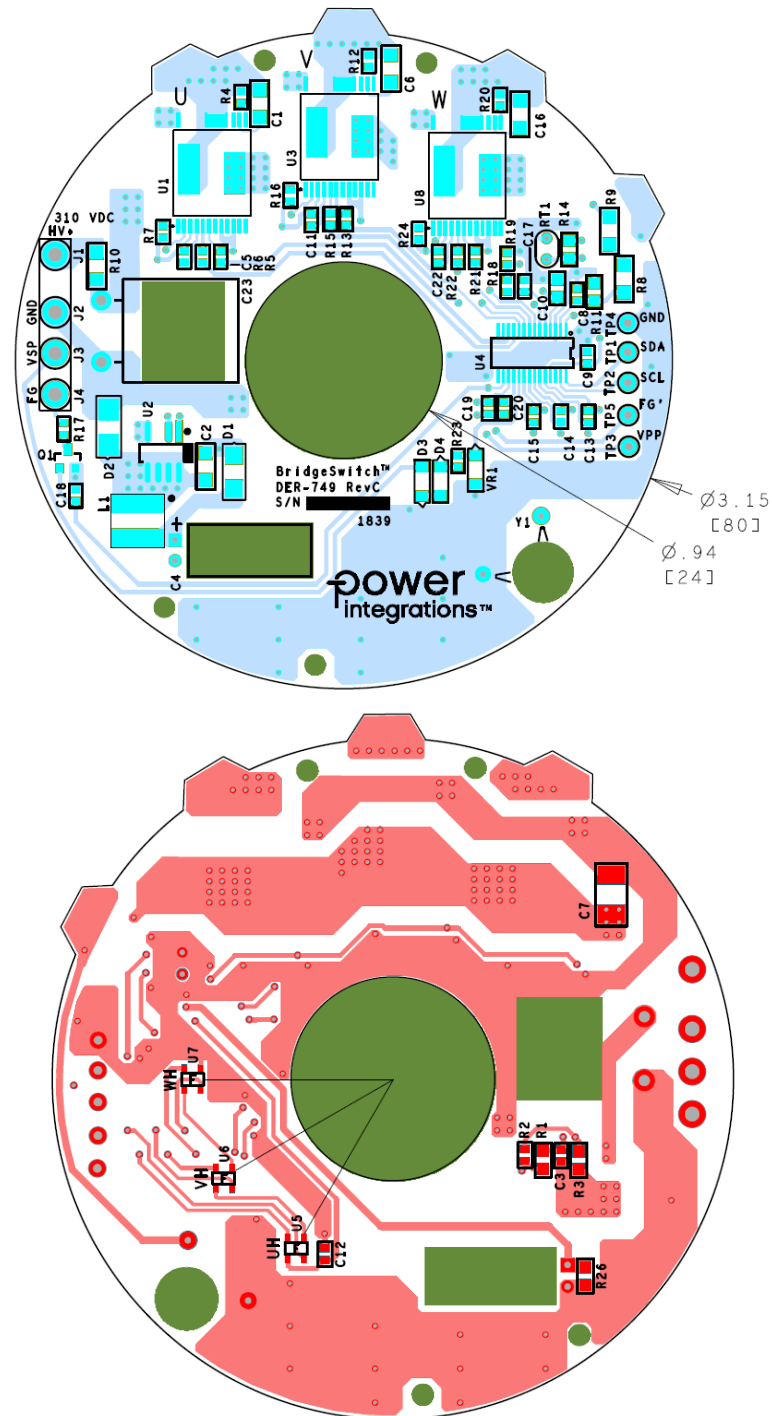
Printed Circuit Board Layout Top and Bottom View.
